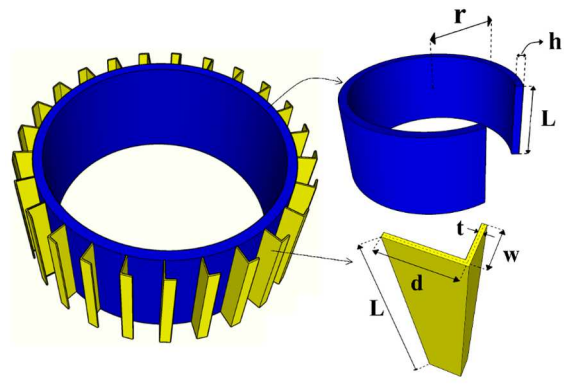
Details of cylindrical elliptical shell stiffened by L-shaped stringers.
